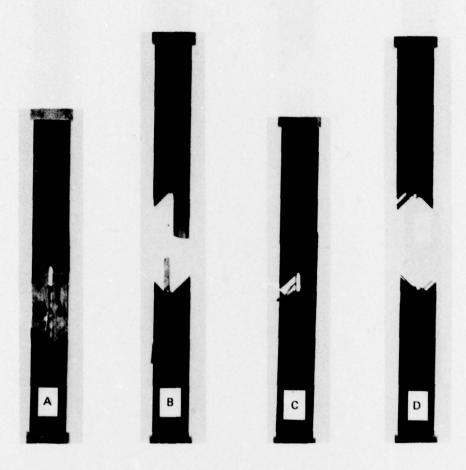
Fatigue failures of multi-directional 0 ± 45° CFC containing a 2mm diameter hole. The endurances to failure were; specimen (A) 11113300, (B) 3955500, (C) 2012300 cycles, (D) failed on run-up to full load
